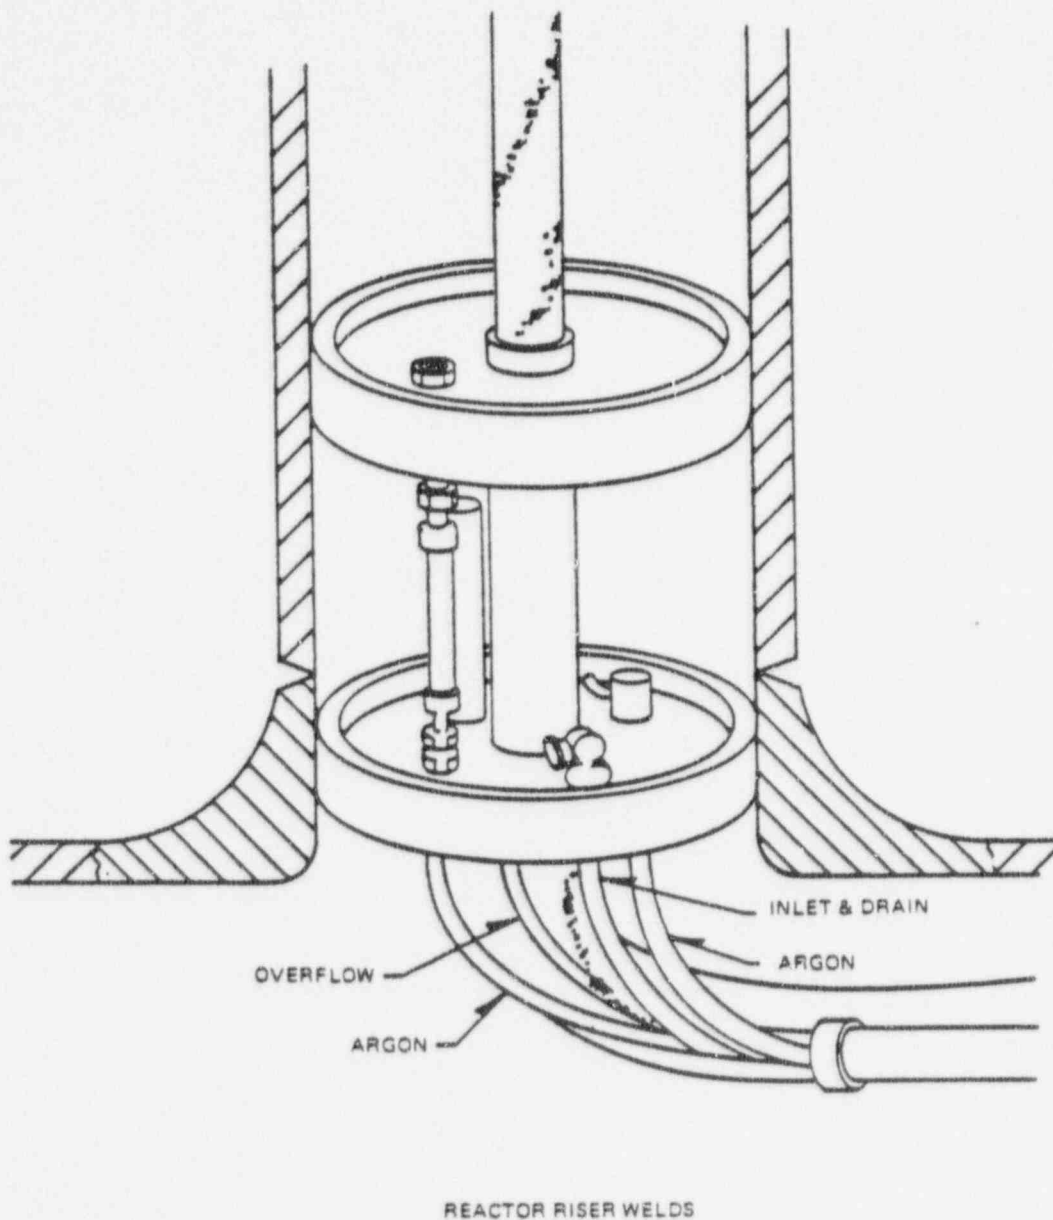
Reactor Riser Sweepolet Weld Heat Sink Welding Equipment
